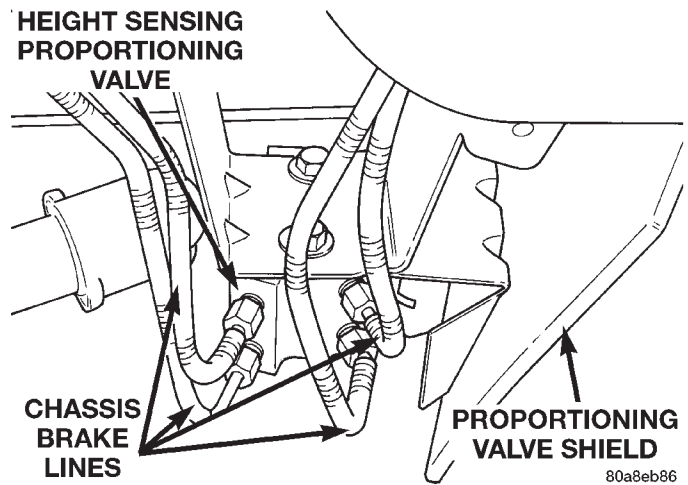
Chassis Brake Tubes At Proportioning Valve
